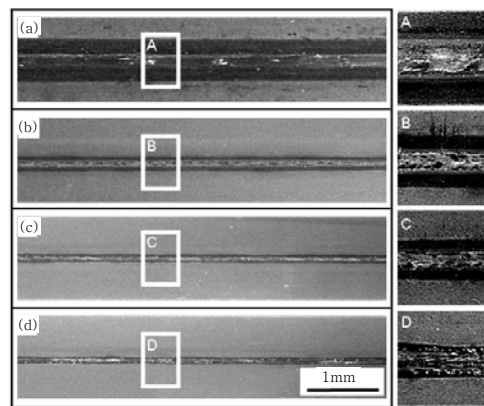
Appearance of bead with welding speed: (a)1.5m/min, (b)2.4m/min, (c)3.6m/min, (d)5.4m/min
